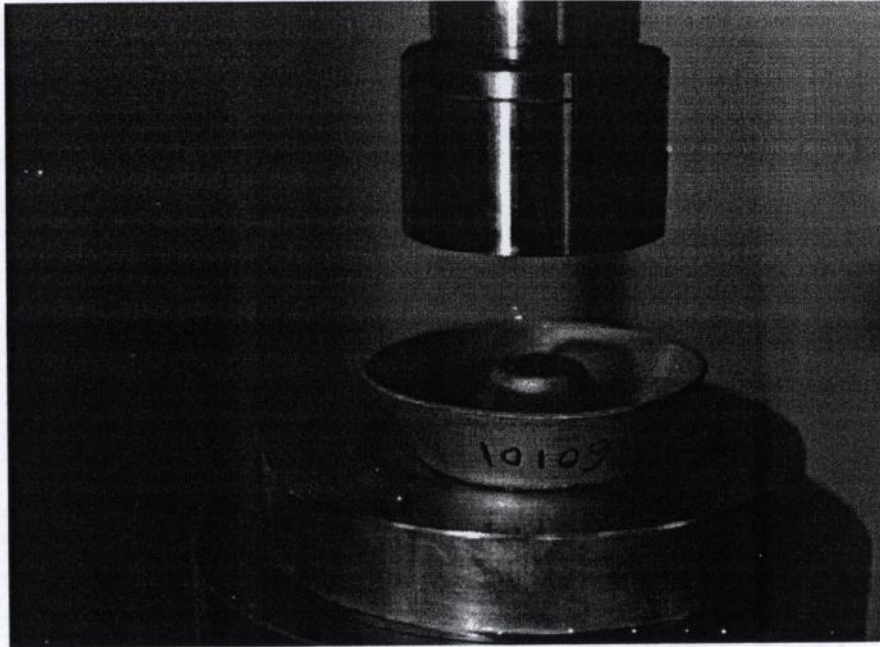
Photograph showing Specimen 60101 after 22 mm of axial crushing (mode III).
